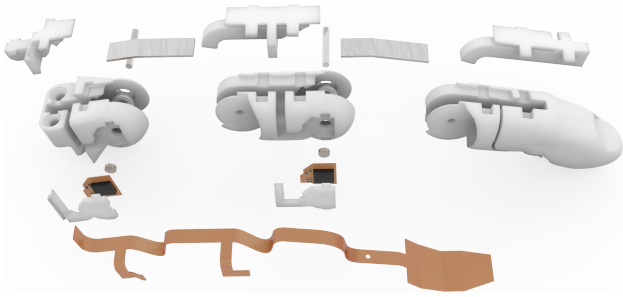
Explosion view of the developed finger. The cable funnel inside the finger as well as the magnetic encoders at the joints are hidden by two covers at each phalanx. In this view, the PCB is separated at the encoder branch-offs to better show the assembly of the encoders at the joints.
